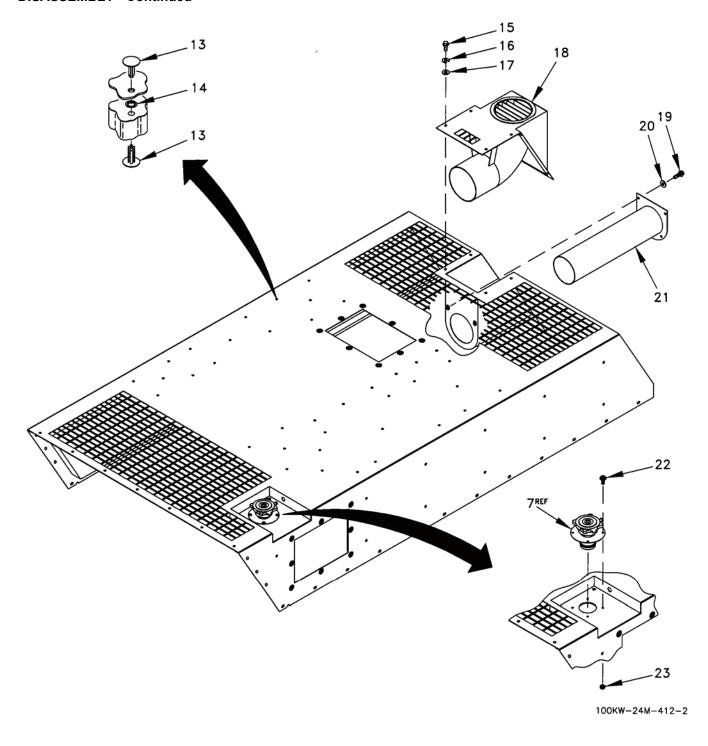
Front Roof Section Housing Assembly (Sheet 2 of 2).
